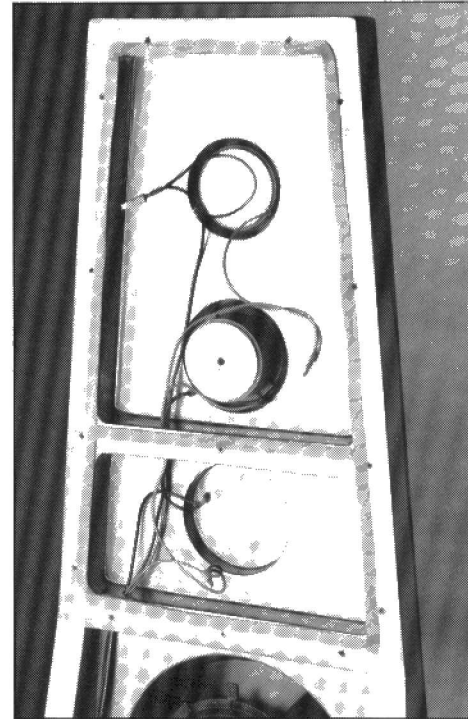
Rear view of the nearly finished baffle; note the milled hole for the squawker.
